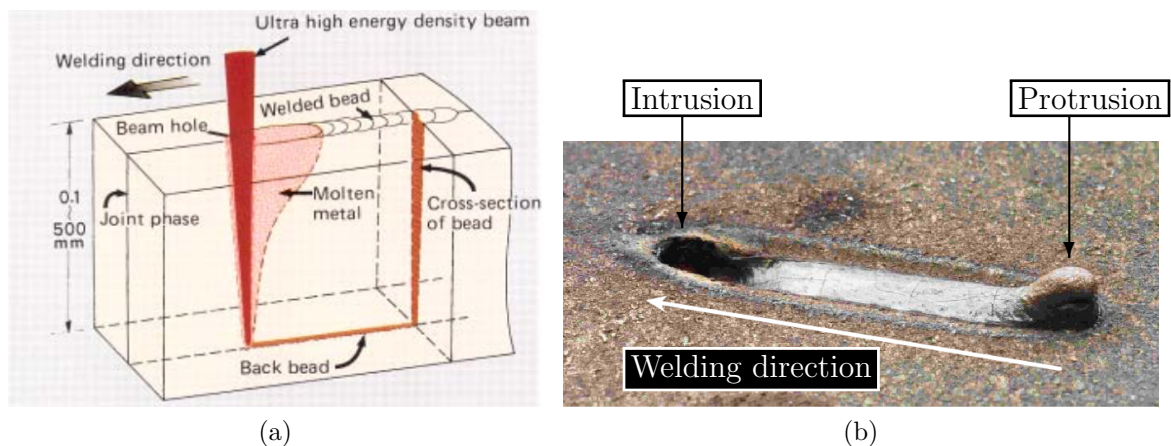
Electron beam welding technique: (a) Keyhole formation [21] and (b) the resulting protrusion-intrusion effect from a single beam swipe [22]
